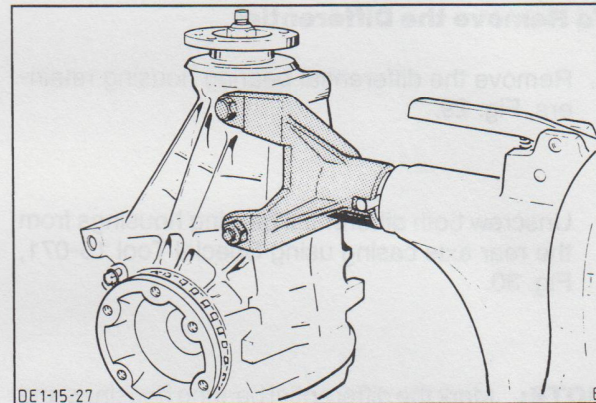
Rear axle casing secured to assembly stand using mounting bracket 15-070.
